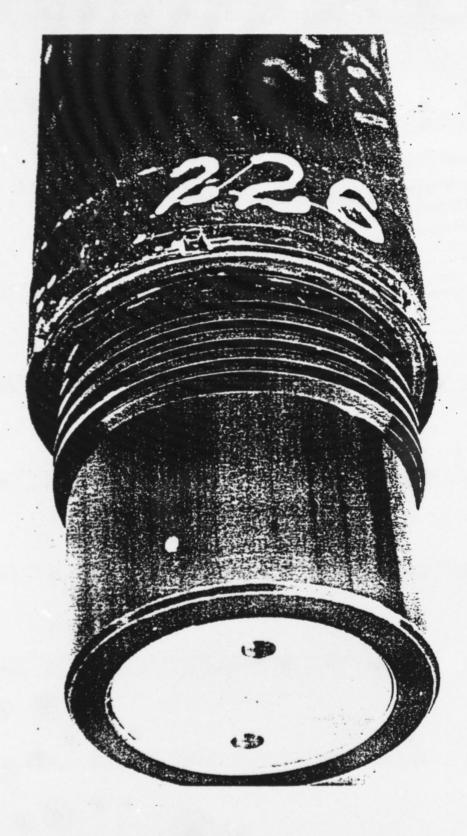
Rd. No. 226. Warhead case pins or rivets sheared and elongated the pinholes in the warhead case assembly after 45° to nose and 45° to base drops.
